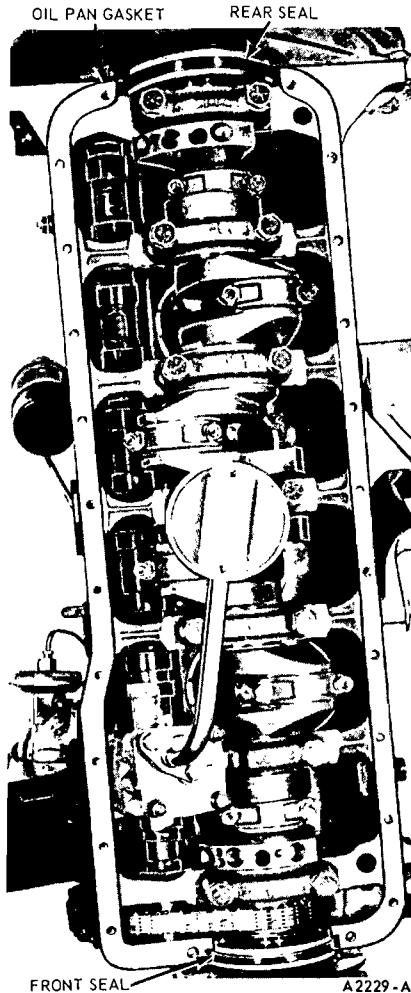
200 Six Oil Pan Gaskets and Seals Installed
